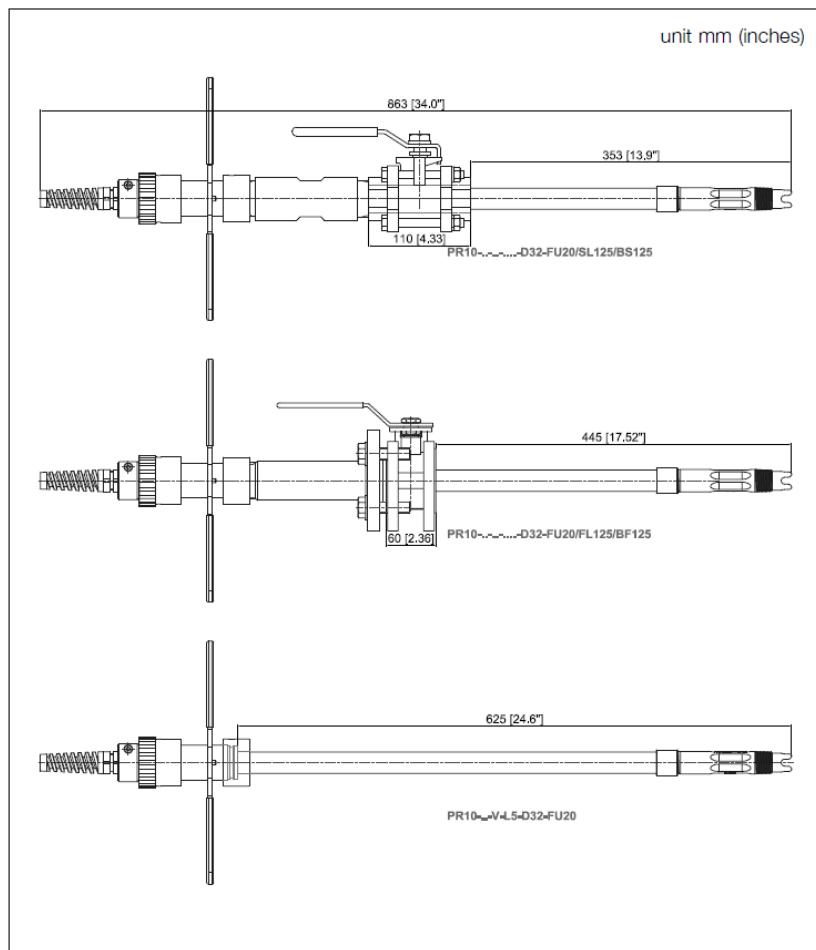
Dimensional drawing PR10...-D32 with mounted FU20 sensor
